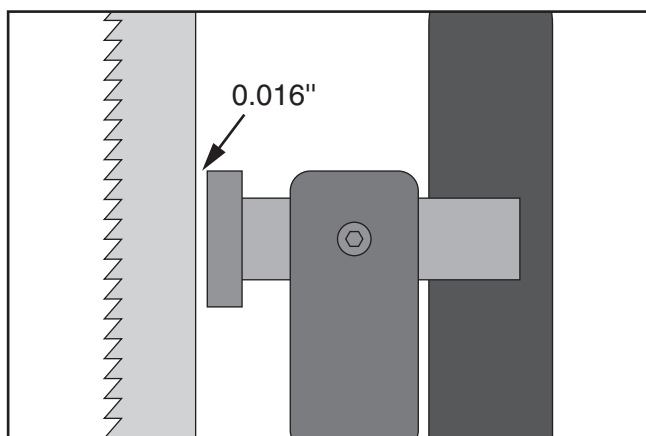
Blade should be aligned approximately 0.016" away from the bearing edge.
